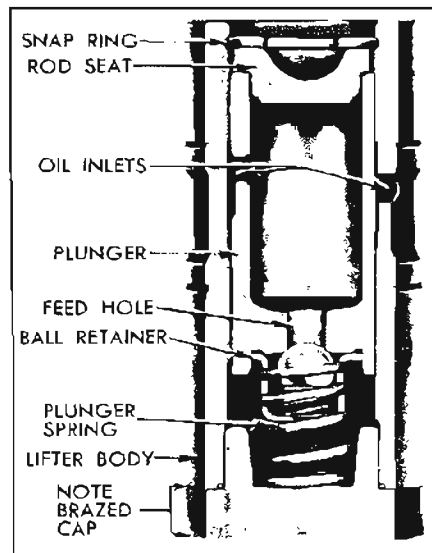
Hydraulic Valve Lifter, Sectional View
